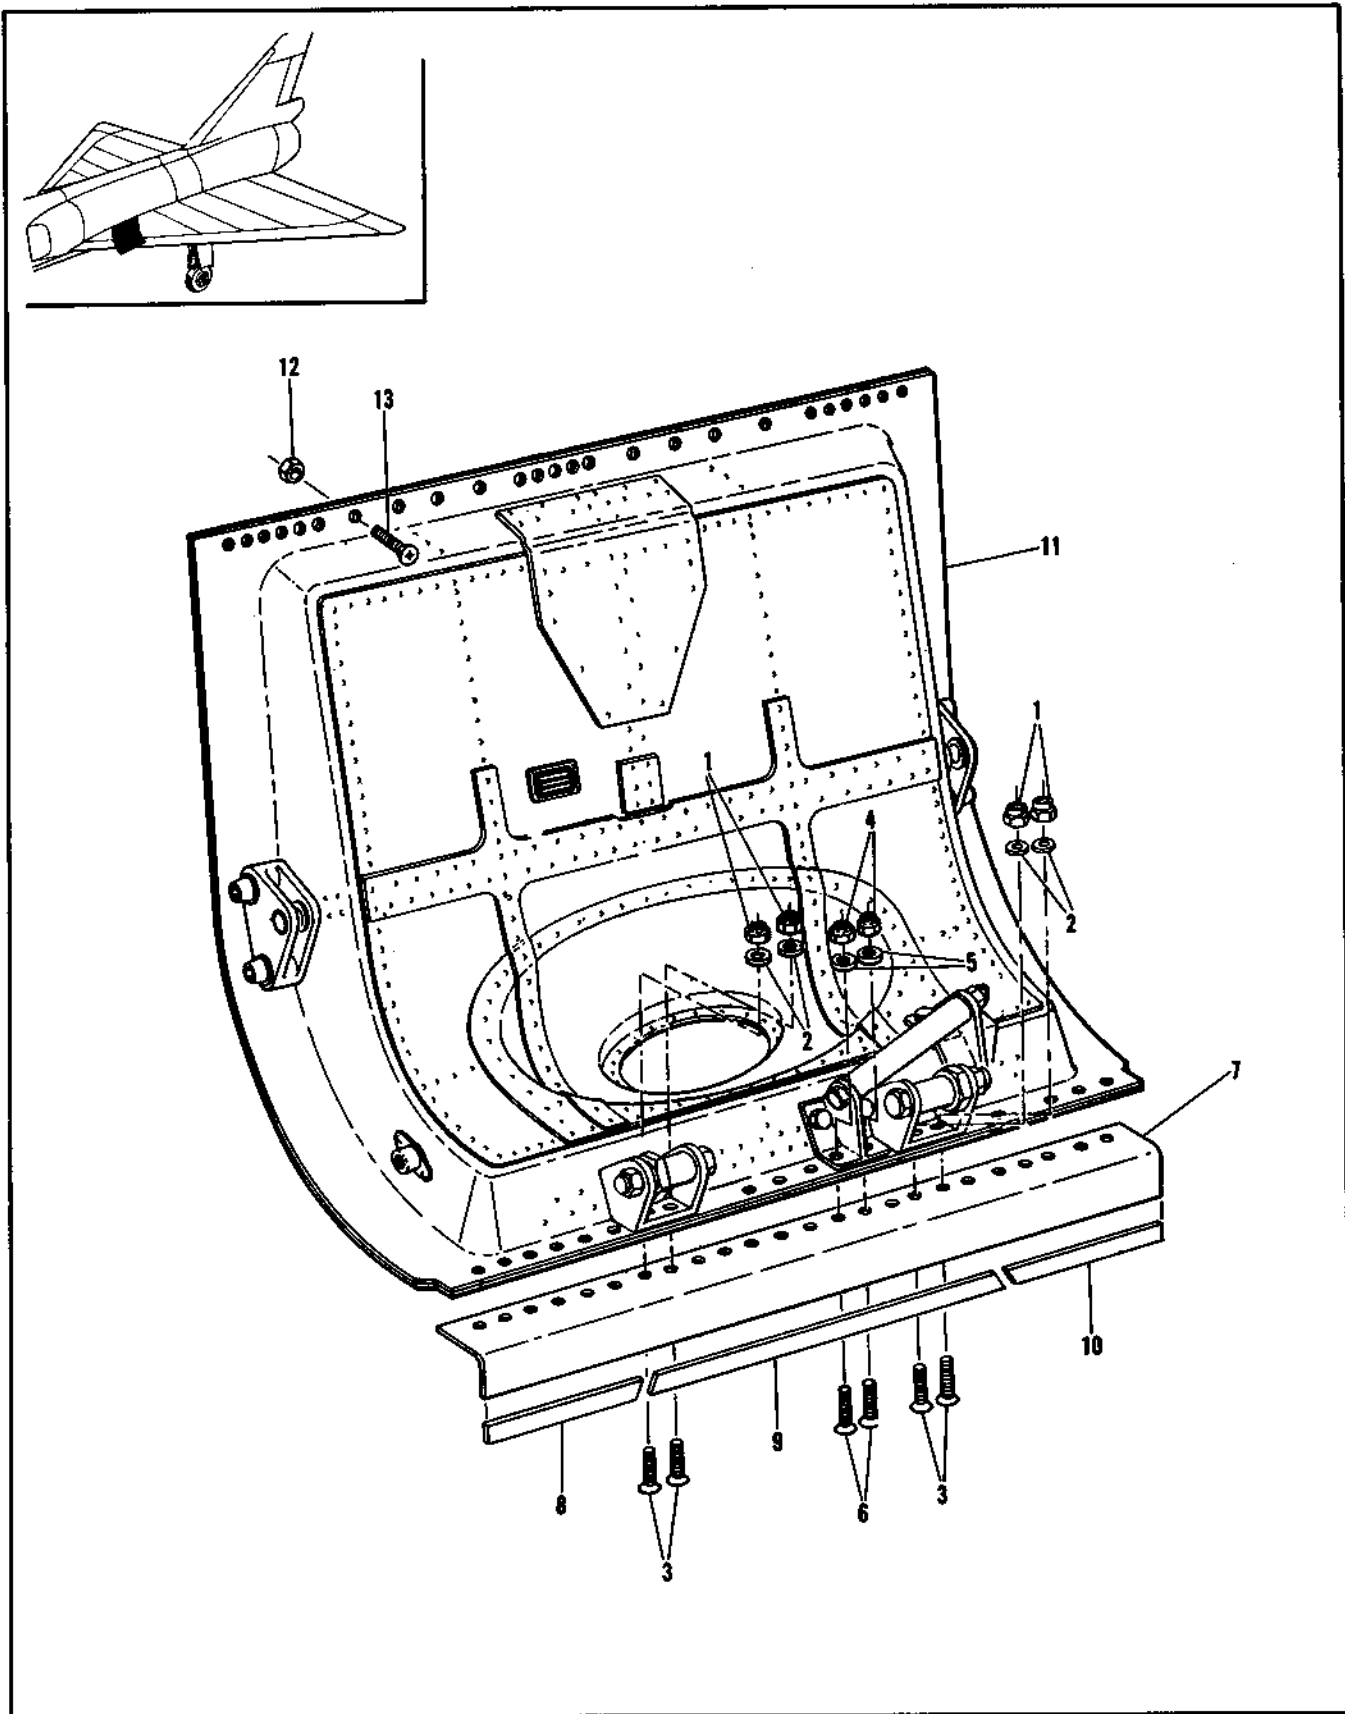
Main Landing Gear Door Assembly Spares
